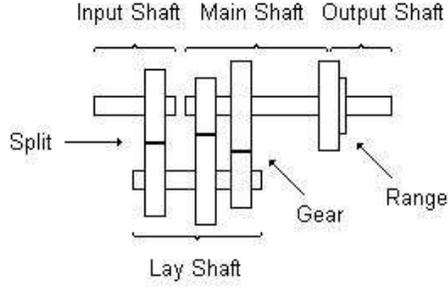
The gearbox in principle. A real gearbox has more cogwheels than the picture shows.
